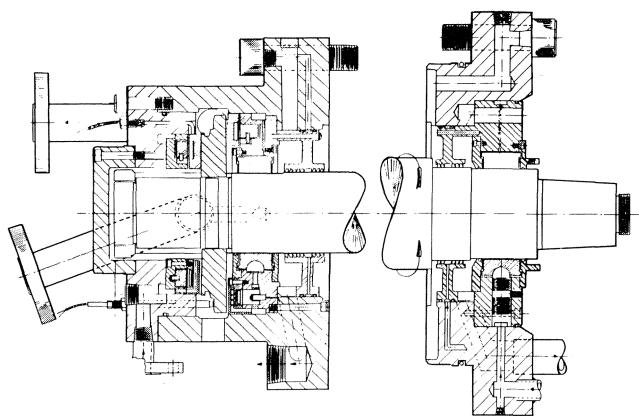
Recycle Gas Compressor Bearing Arrangement.
